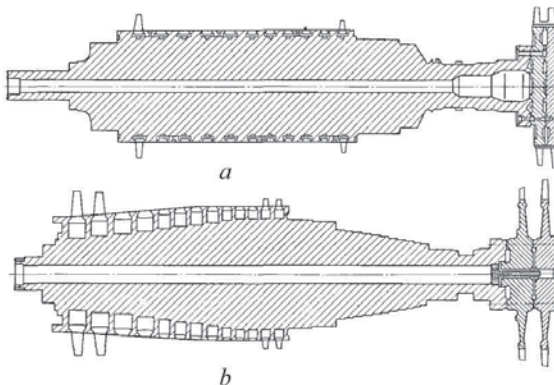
Rotors of gas turbine engines (on the left side – solid drum-type rotors of axial compressors, on the right side – disk-type composite rotors of turbines) [7]:
